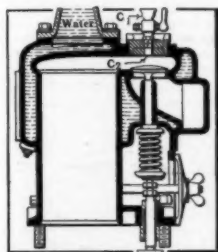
Section of motor cylinder showing a noise cavity, due to a short threaded part of the priming cock in the cover
